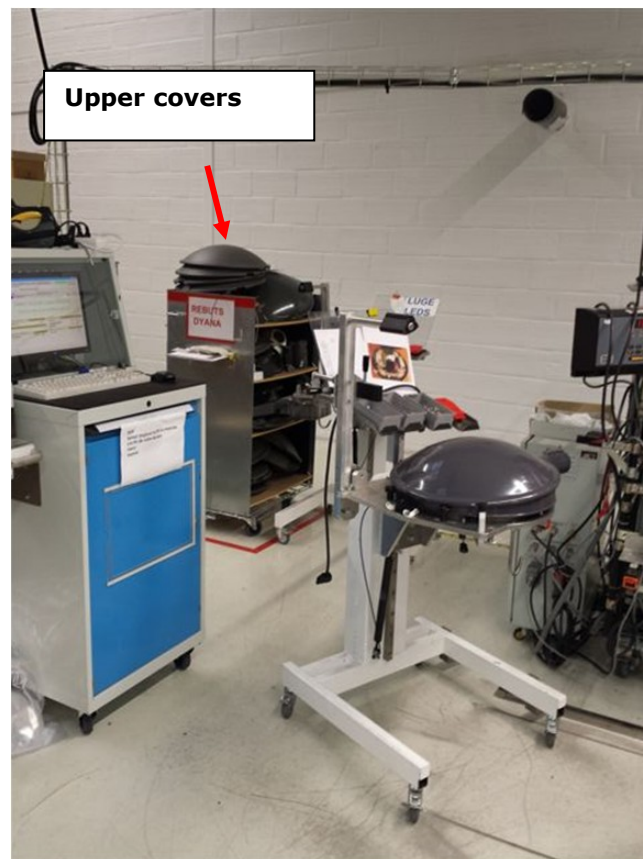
Installation of upper cover of the luminary body and the sealing fixture.
